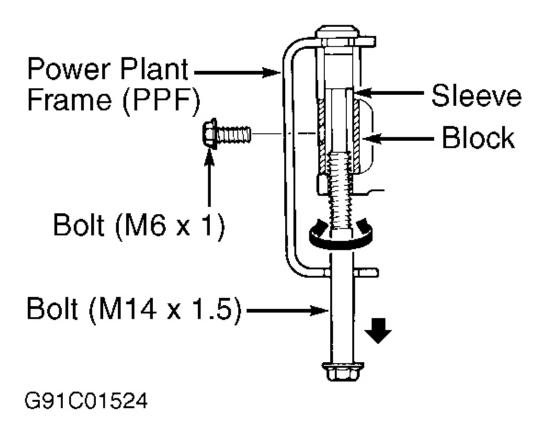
Removing Reamer Bolt Sleeve (Miata) Courtesy of MAZDA MOTORS CORP.
